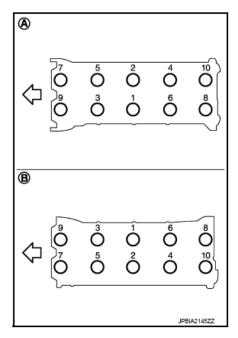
Cylinder Head Bolts Tightening Sequence (Bank 1 And 2) Courtesy of NISSAN MOTOR CO., U.S.A.
